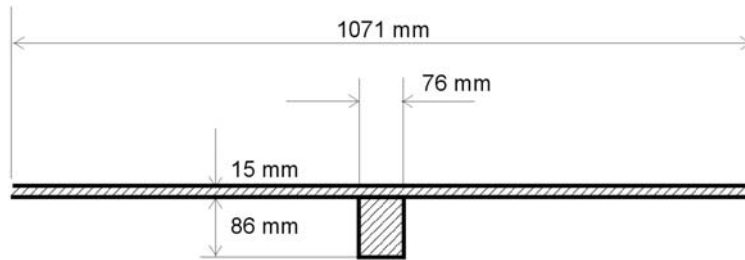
Horizontal Section Through the Wall of the Drip Shield
